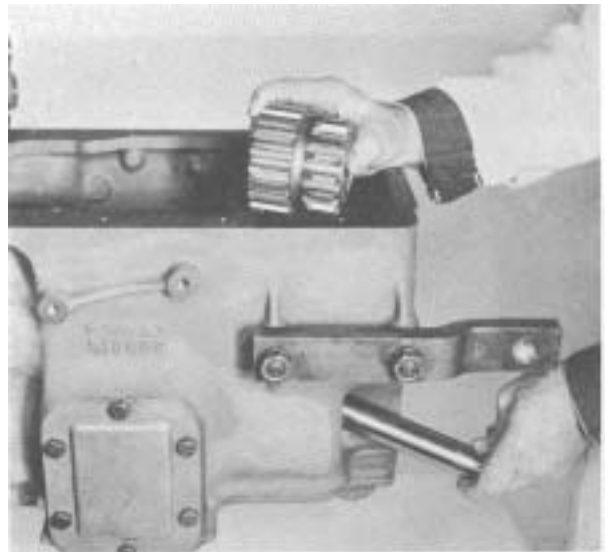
Install reverse idler gear as shown. Insert idler shaft through case and idler gear. NOTE: Idler shaft lock groove must line up with lock bolt hole. Drive shaft into position. Install shaft lock and bolt. Tighten bolt 20 to 25 ft. lbs. torque [27,2 - 33,8 N.m].
